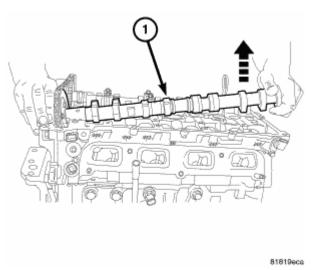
RAISE INTAKE CAM Courtesy of CHRYSLER LLC
